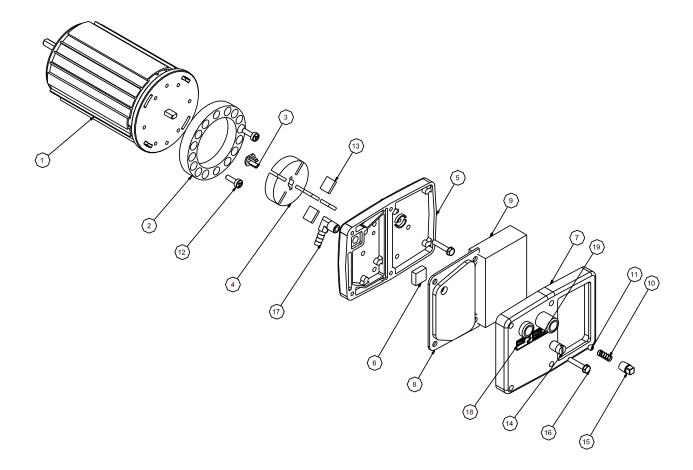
MOTOR AND PUMP ASSEMBLY (53485)
